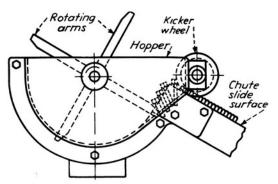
Same type hopper and rotating arms as in Fig. 429, but a different chute, designed to feed bolts. Kicker wheel at the mouth of the chute kicks back into the hopper the bolts that do not enter the chute properly.
